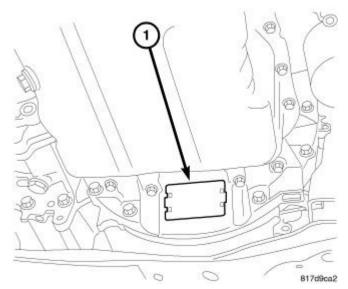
Inspection Cover Courtesy of CHRYSLER GROUP, LLC
